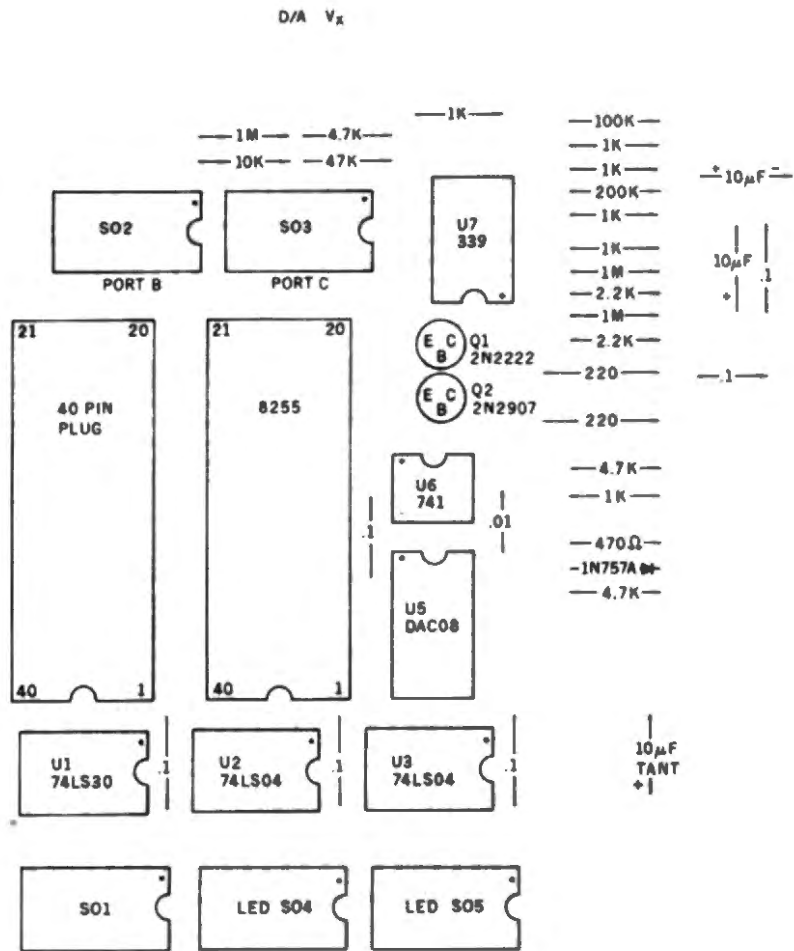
Component placement on pc board (Overlay of Fig. 11a).
